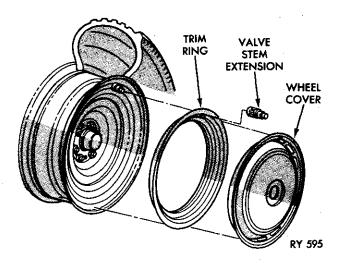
16-Inch Wheel Trim Ring & Wheel Cover WHEEL BEARING SERVICE
